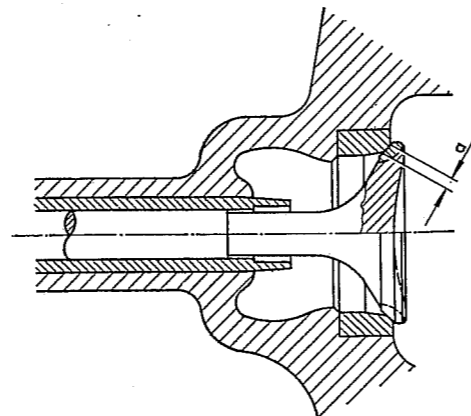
Valve seat width, dimension "A", should be: - Inlet valve: 1.3-1.6mm. Exhaust valve: 1.7-2.0mm.
